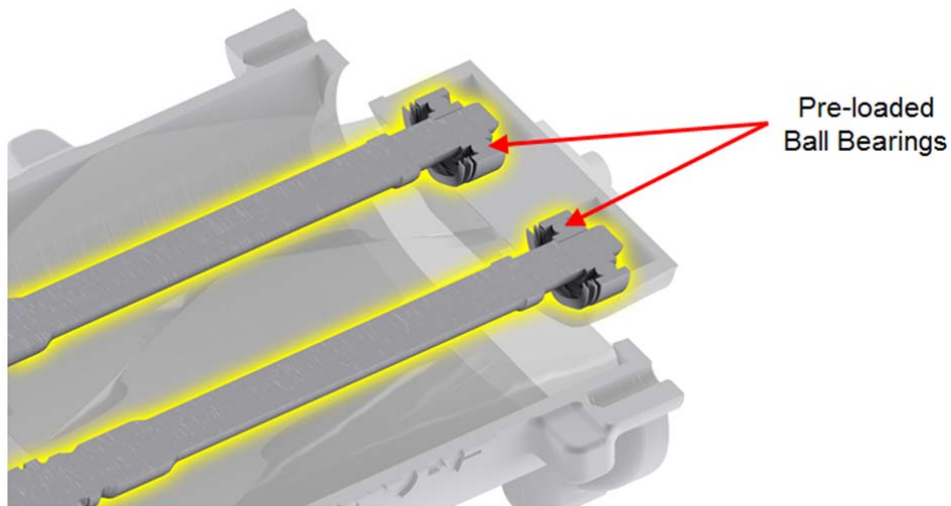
Rear ball bearing design configuration helps prevent mechanical NVH concerns, especially at light loads
